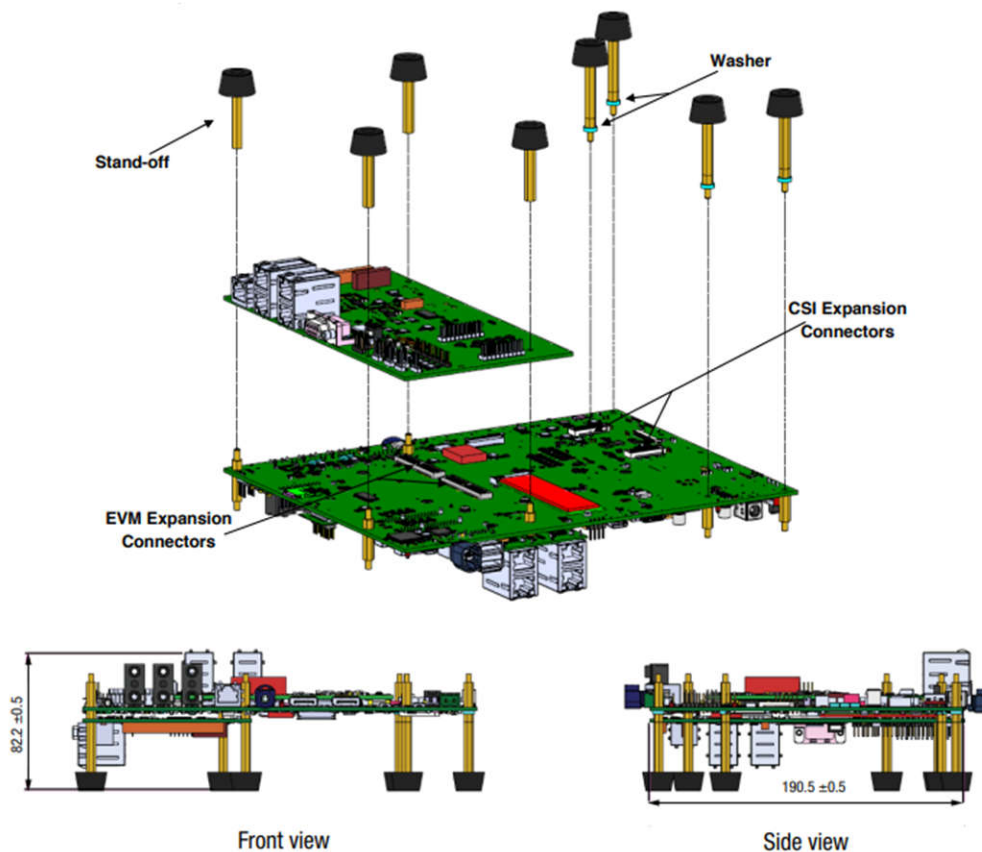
Installing the Automotive Gateway/Ethernet Switch/Industrial Expansion Card Onto the Common Processor Board
